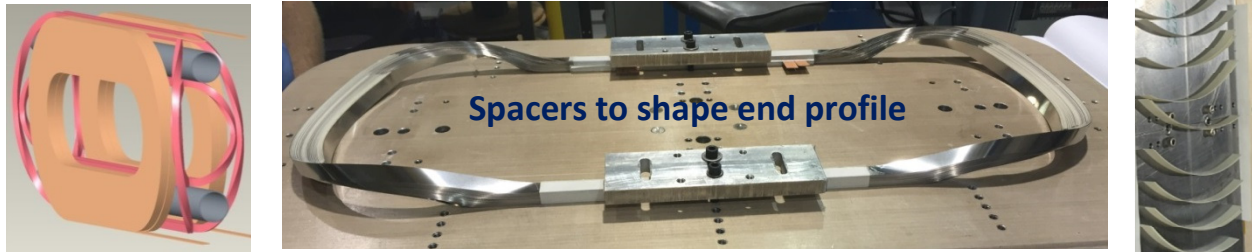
Schematic of a possible pole block design that clears the beam tube (left), practice windings (middle) made with spacers of Nomex sheet (right) that will be replaced by parts with better conforming geometry made with 3-d printer during the course of proposed work.
